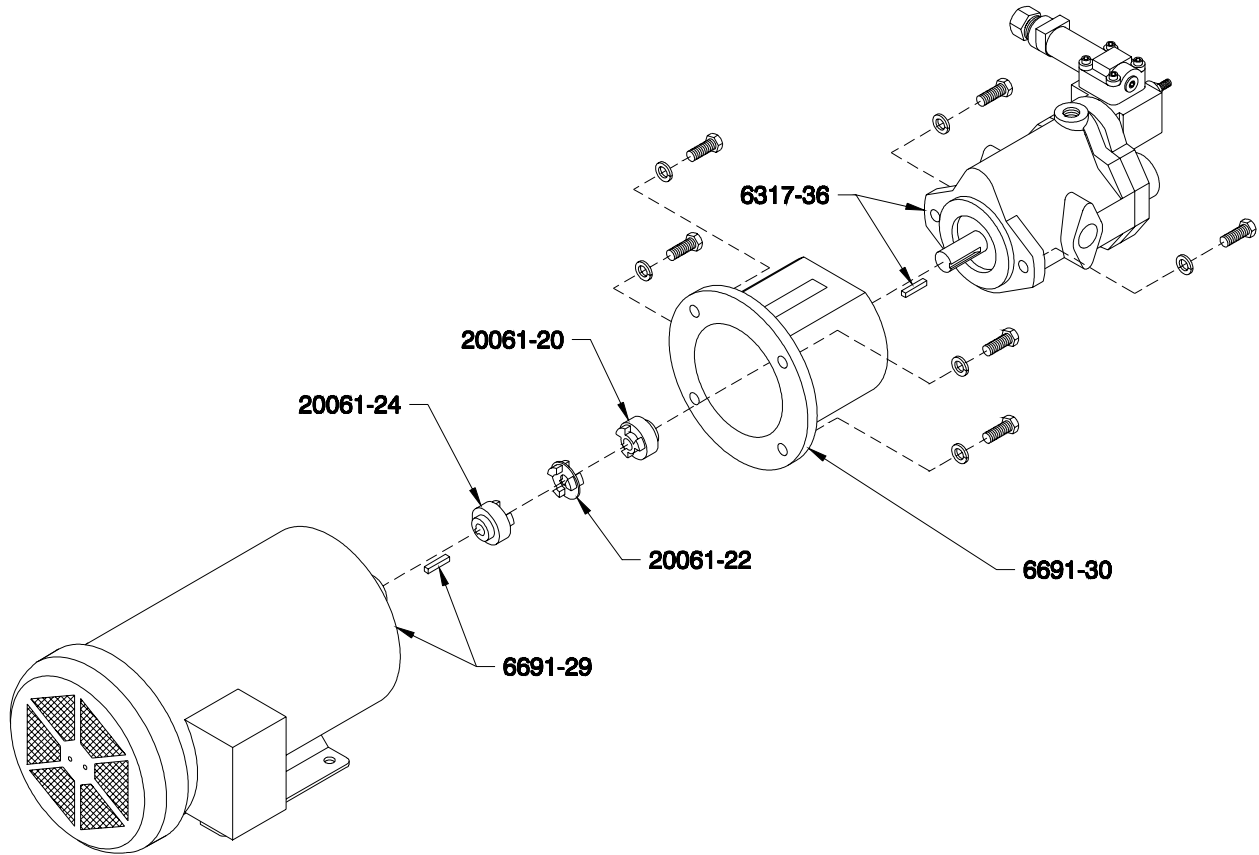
Motor Line Assembly, Three Phase, 200 Volt, (Part No. 58503-200), Exploded View
